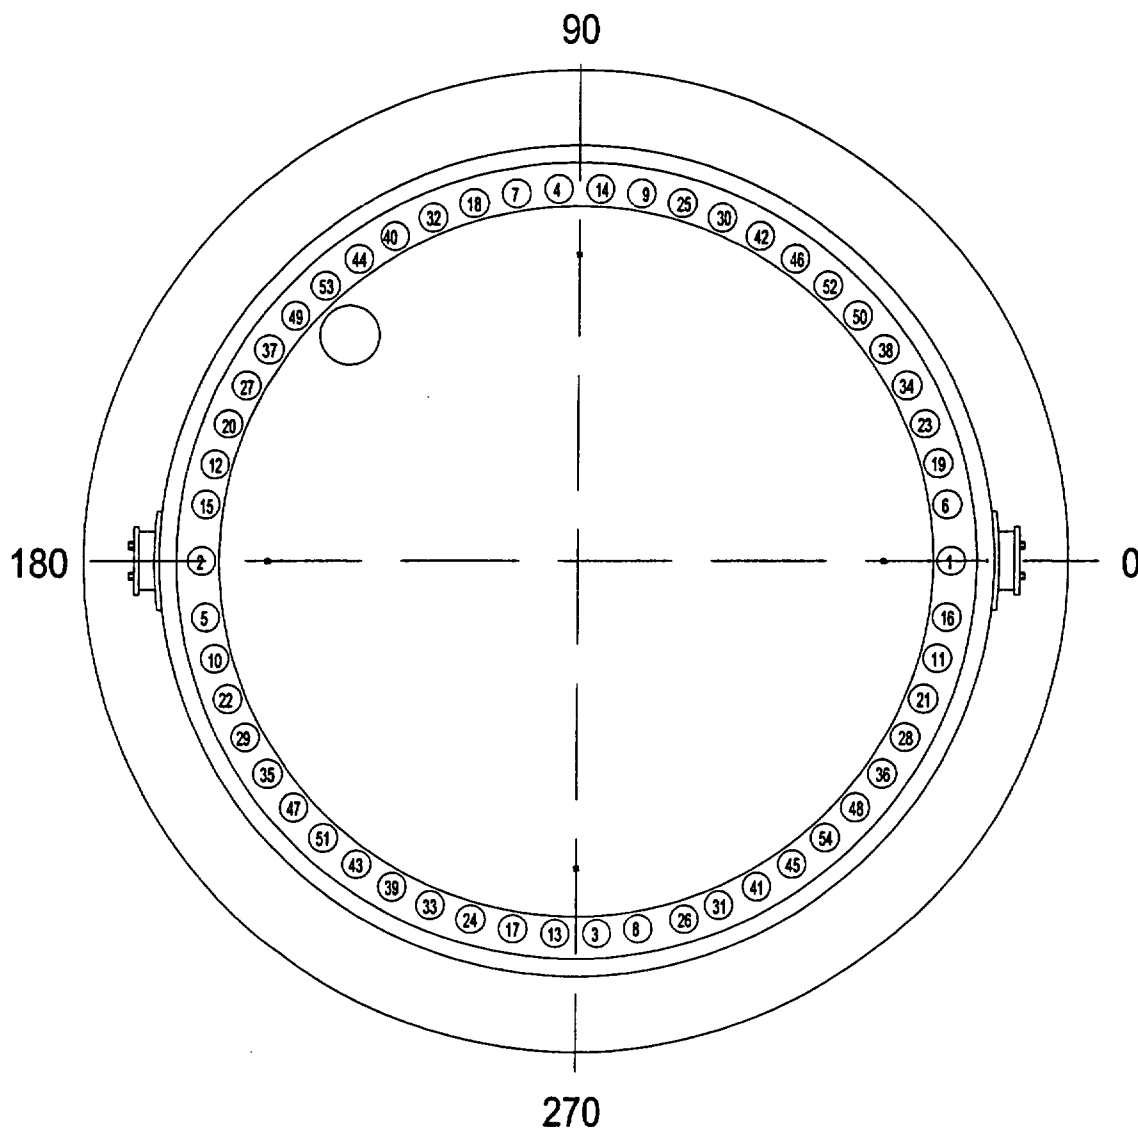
; HI-STAR Closure Plate Bolt Torquing Pattern
